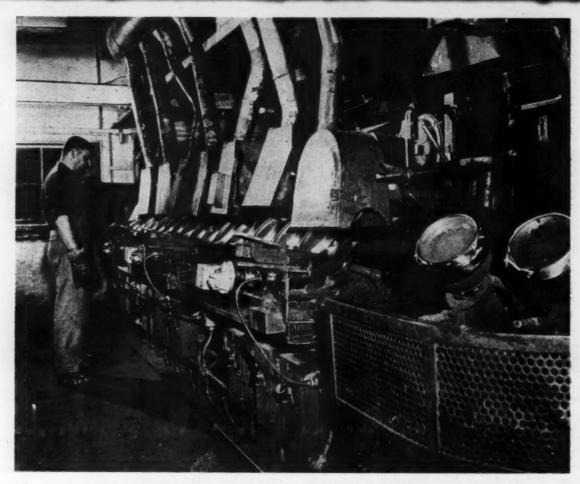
Headlamp doors are polished, buffed and colored at the rate of 400 an hr while being advanced on rotary carriers under 16 successive wheels of this Robinson machine.
